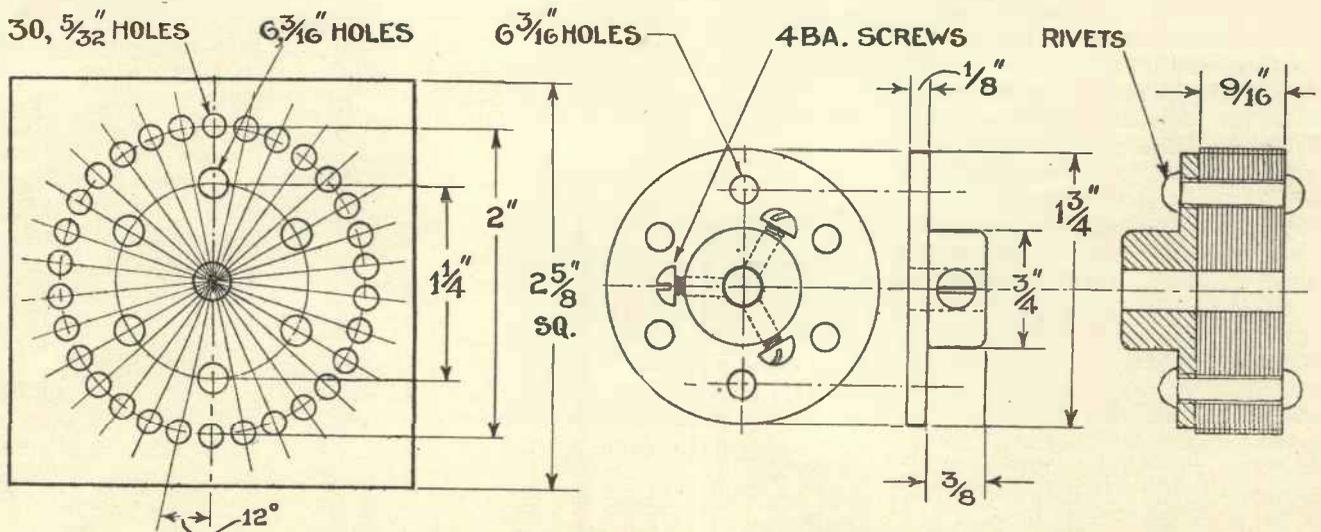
These diagrams give the details of the toothed wheel and the method of assembly.
